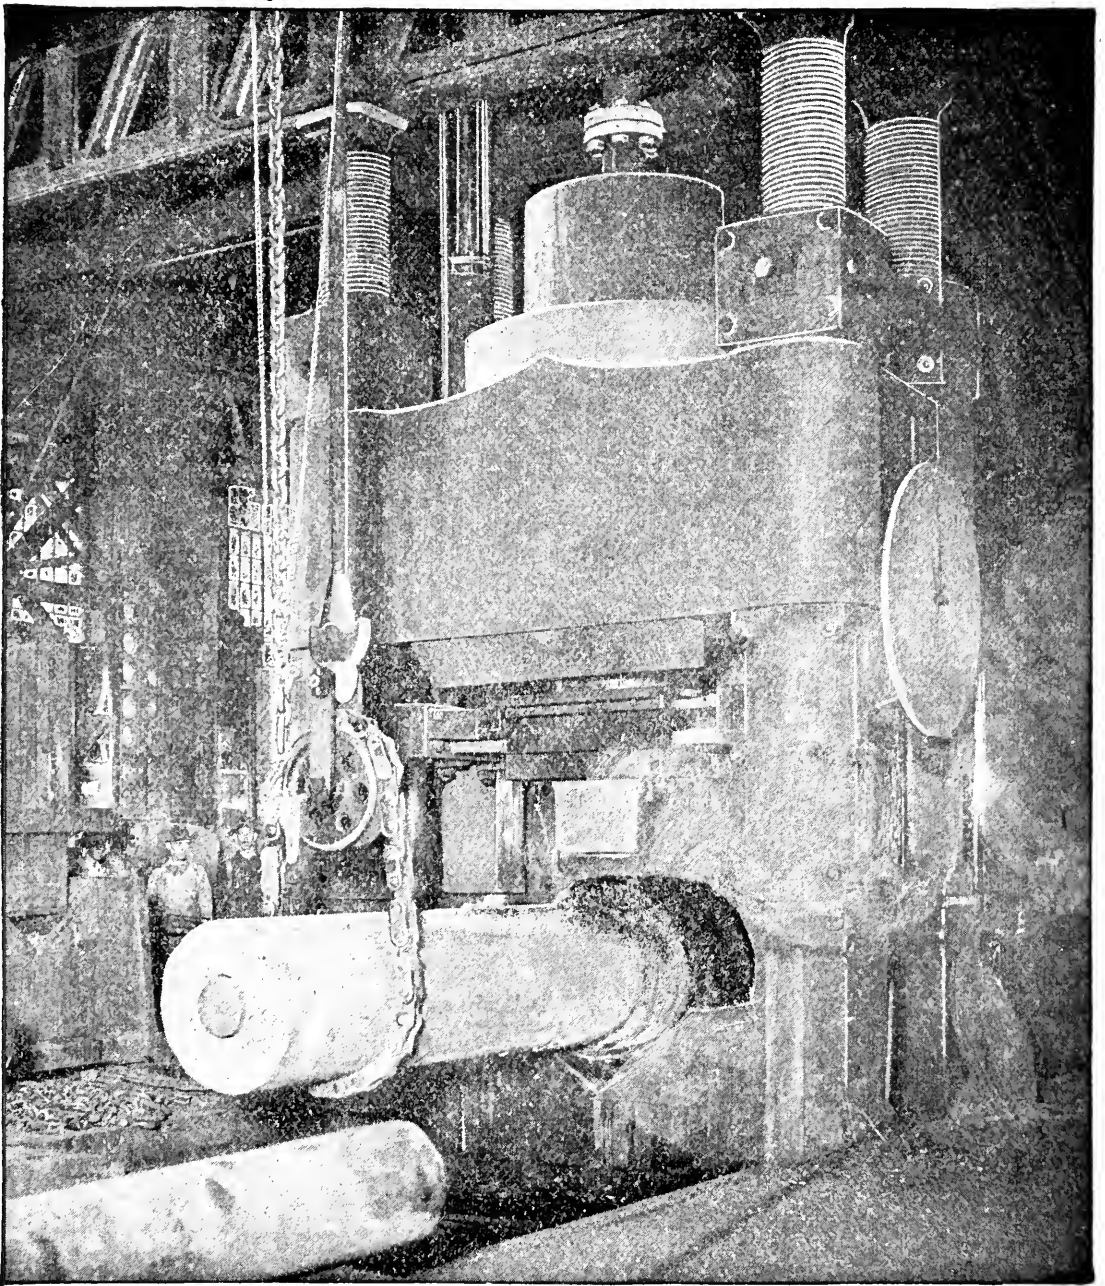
HOLLOW FORGING A SHAFT UNDER 5,000-TON HYDRAULIC PRESS
